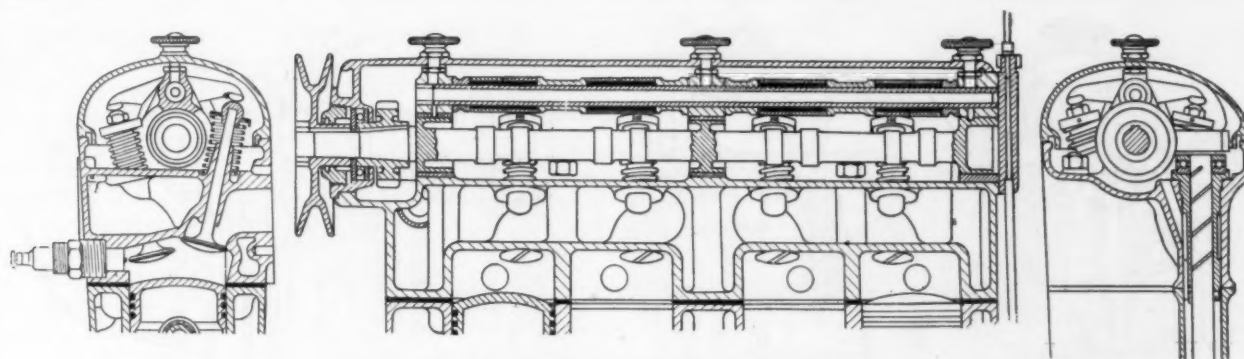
DETAILS OF THE ANSALDO ENGINE
